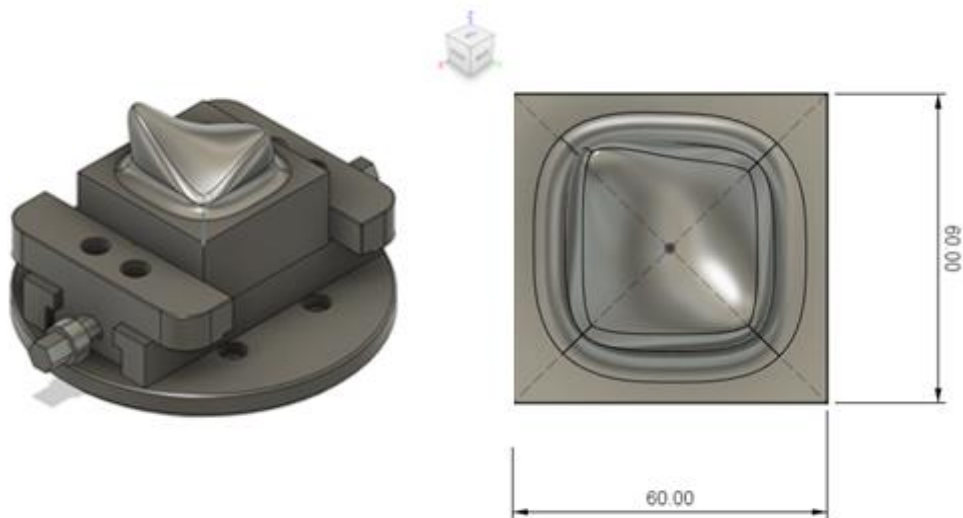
Part 5 to be machined with 5-axis continuous toolpath and containing a tool change
